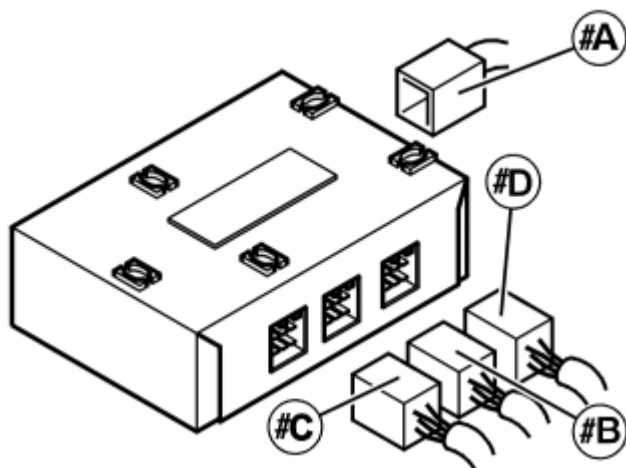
Identifying Rear Seat Entertainment Module (RSE)
